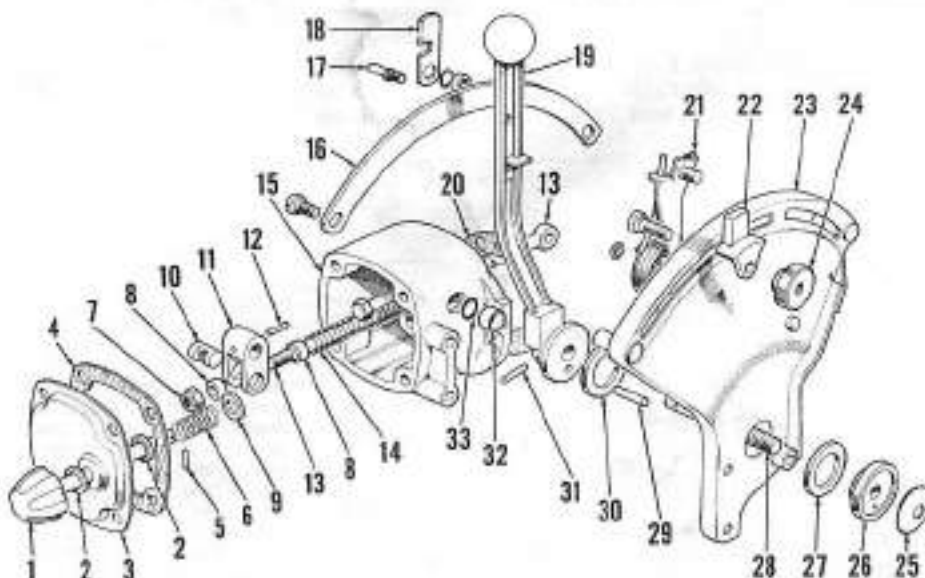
Exploded view of control lever housing assembly. Note that connecting rod (13) is also shown in exploded view of control mechanism (rockshaft right hand support bracket) housing. Refer also to assembly drawing in Fig. 305.
